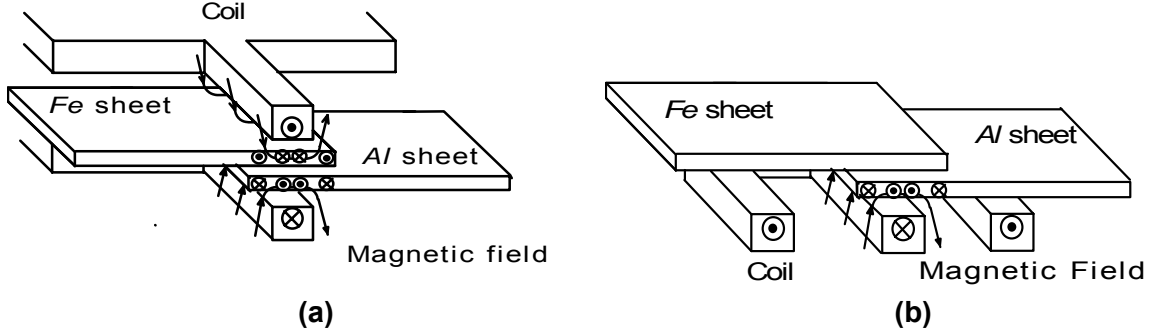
MPW coil structure: a) Double layer H-shaped flat coil and b) One layer E-shaped flat coil
